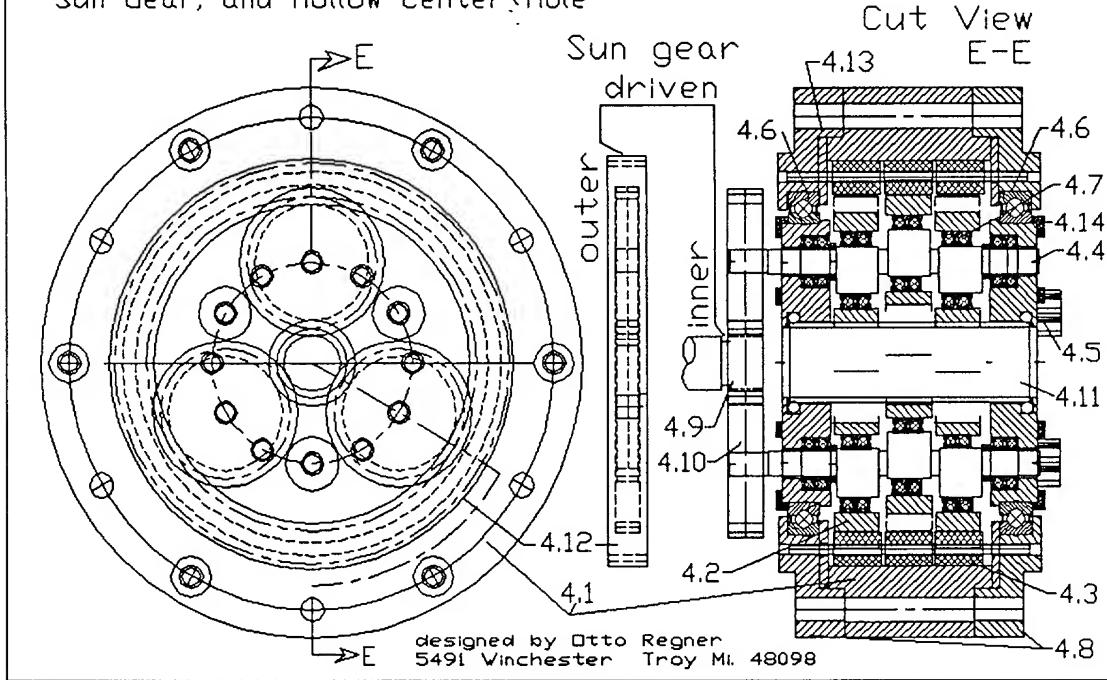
Center-Driven Cyclo Integrated Gear-Axes with 1 or 2 or 3 Disks, and Six Torque Bars with Low-Friction Bushings, and Pre-Loaded Cross-Roller Bearings.
